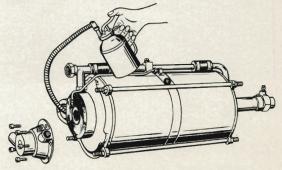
Tandem Piston without Lubrication Ports. (lubrication of rear piston)
